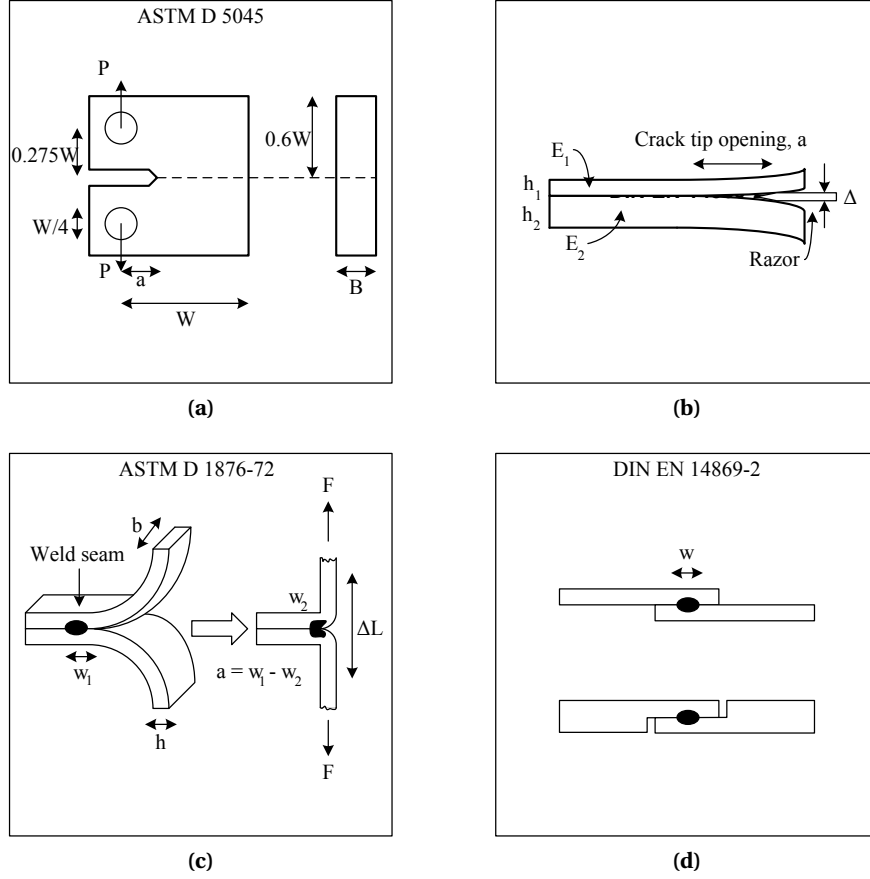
Four ways of designing specimens for weld testing (a) Compact tension test [Wool, 1995]. (b) Asymmetric double cantilever beam [Creton et al., 1992]. (c) Lap-joint peel test [Xue et al., 1998]. (d) Lap-joint shear test [Jaeschke et al., 2010].
